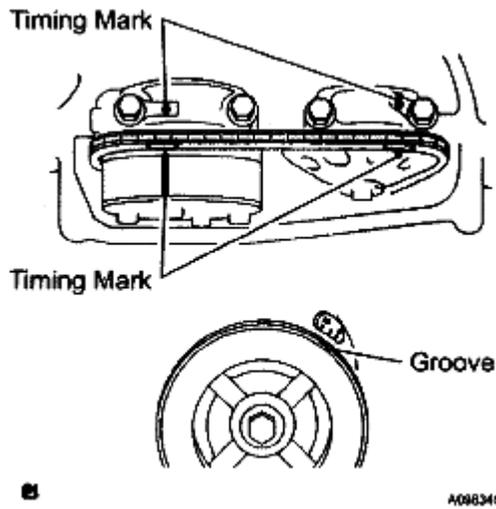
Checking Timing Mark Of Camshaft Timing Gear And Sprocket
